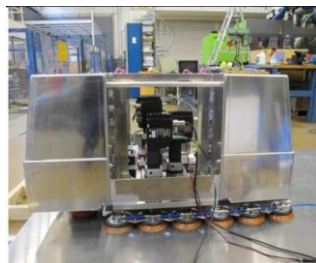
Automated Friction Stir Welding (FSW) Machine for Industrial Applications
